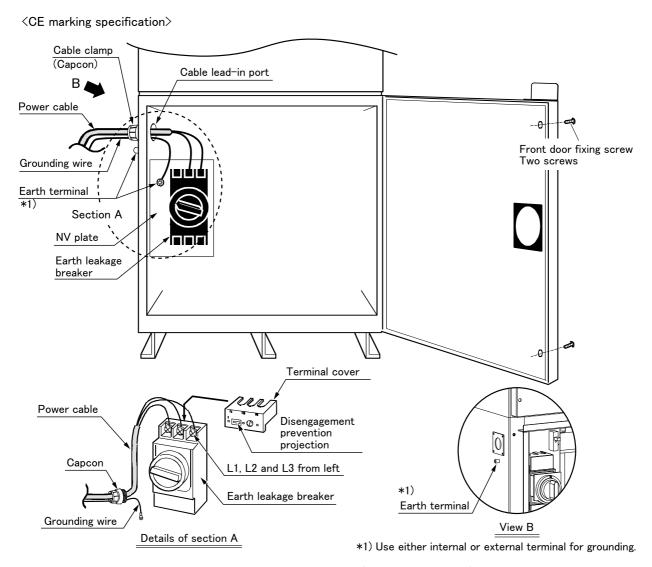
Connecting the power cable and grounding cable (CR760 CE marking)
